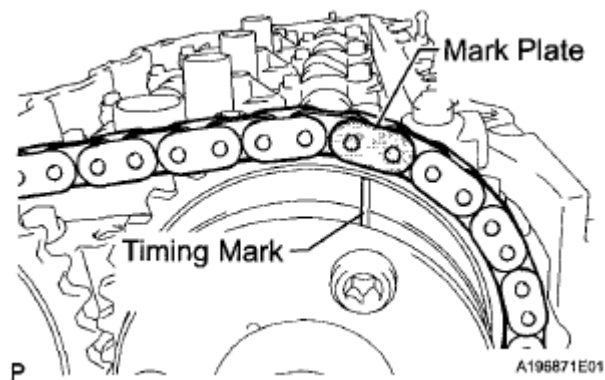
Identifying Mark Plate (Yellow Or Gold) Of Chain And Timing Mark Of Camshaft Timing Exhaust Gear
